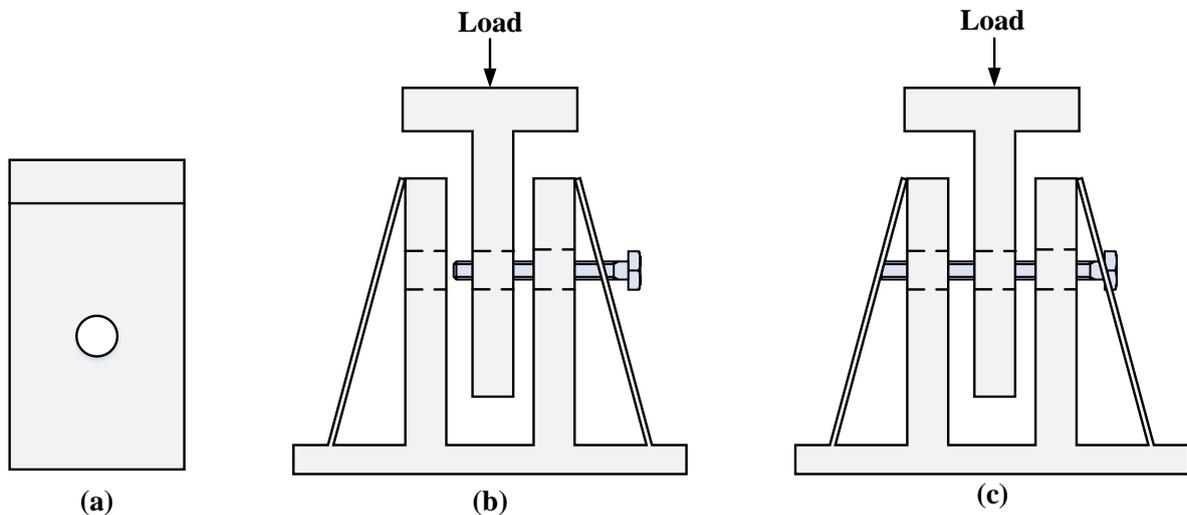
Schematic representation of modified Johnson shear tool, (a) Shear cutter, (b) Single shear and (c) Double shear.
